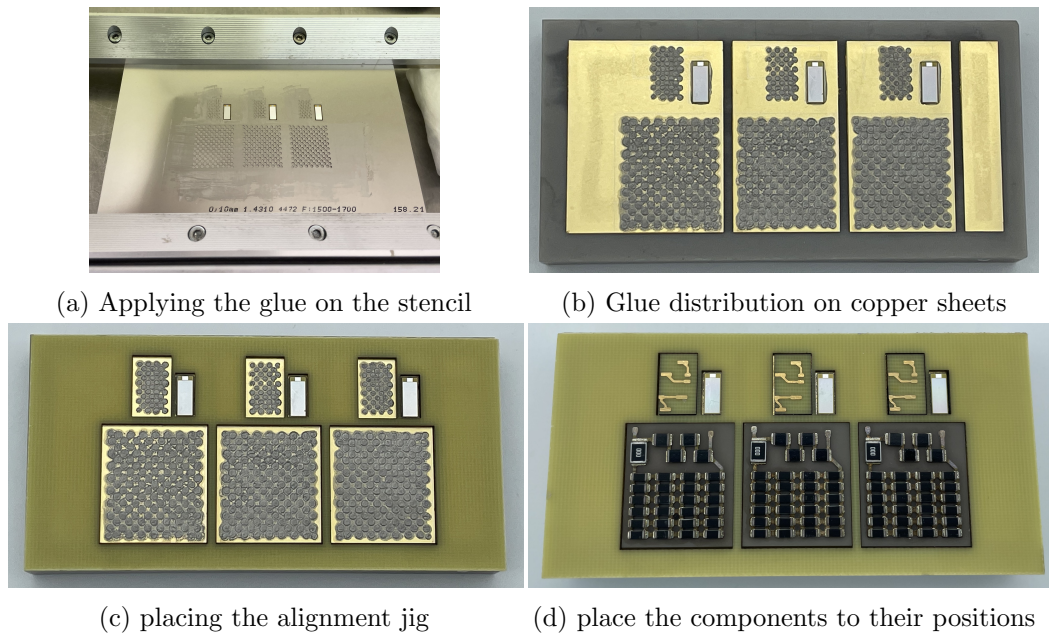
Attaching the DBC and PCB on the metallized cooler
